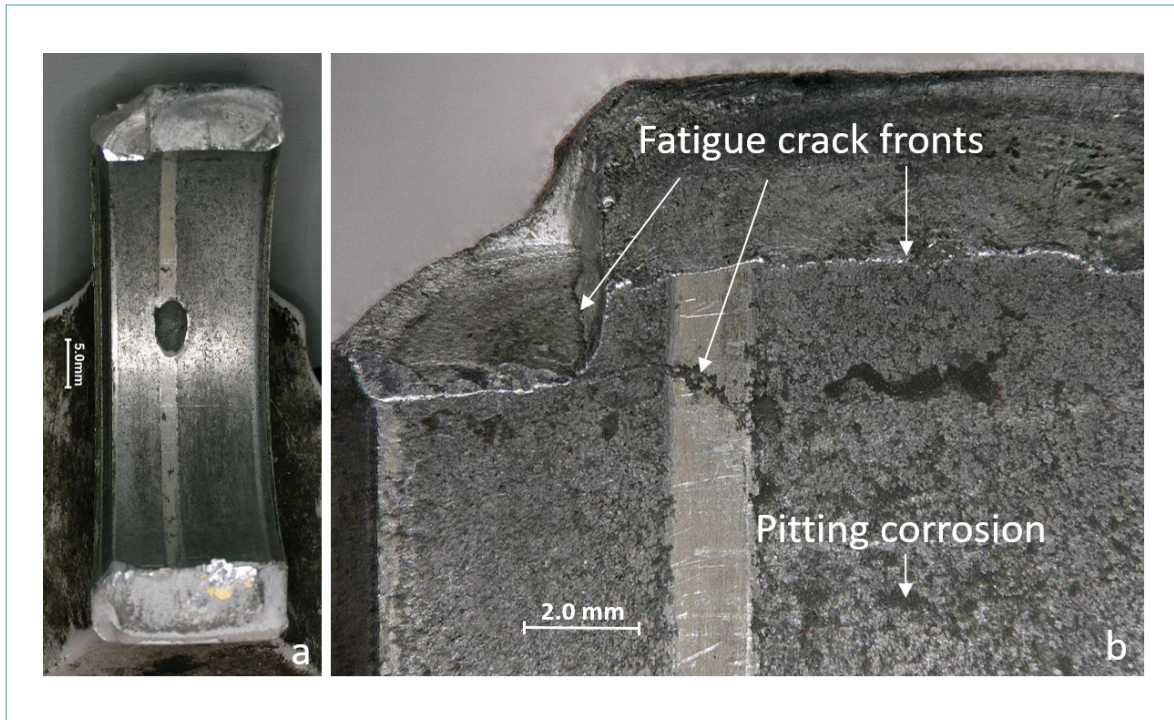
Outboard foreflap fitting inner surface with visible pitting corrosion and close up off pitting corrosion (a) and fatigue crack fronts (b). (Source: owner of the aircraft)
